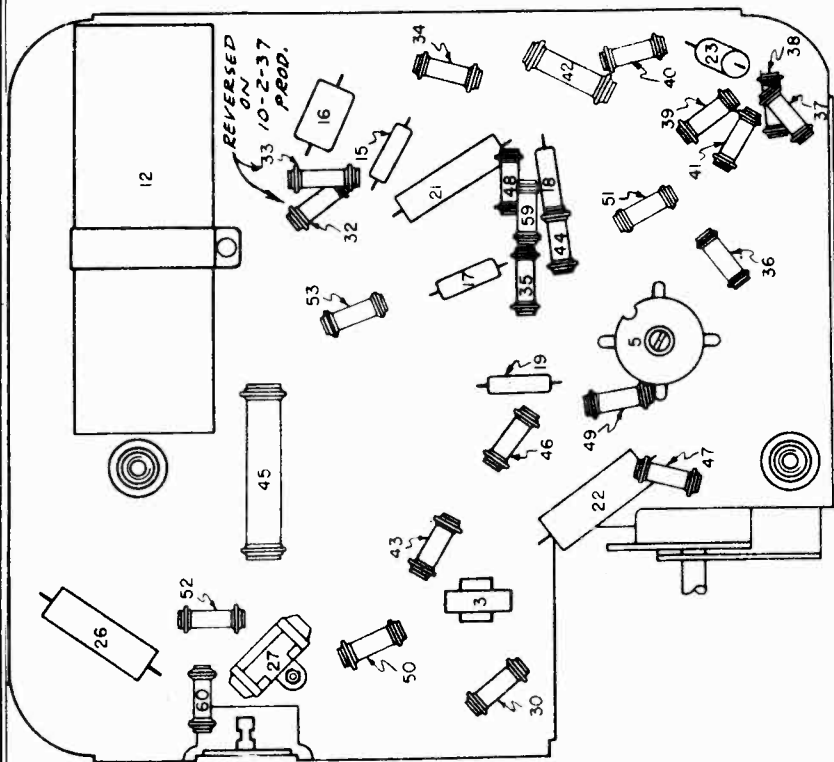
PARTS LAYOUT-BOTTOM VIEW
